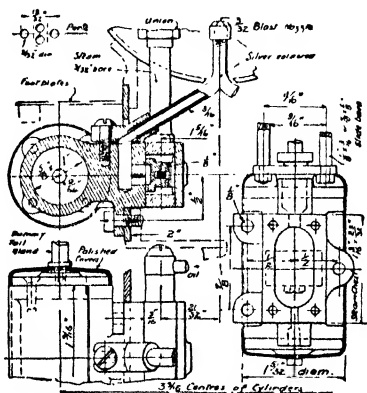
Separate Outside Cylinders for 2½-in. Gauge.
